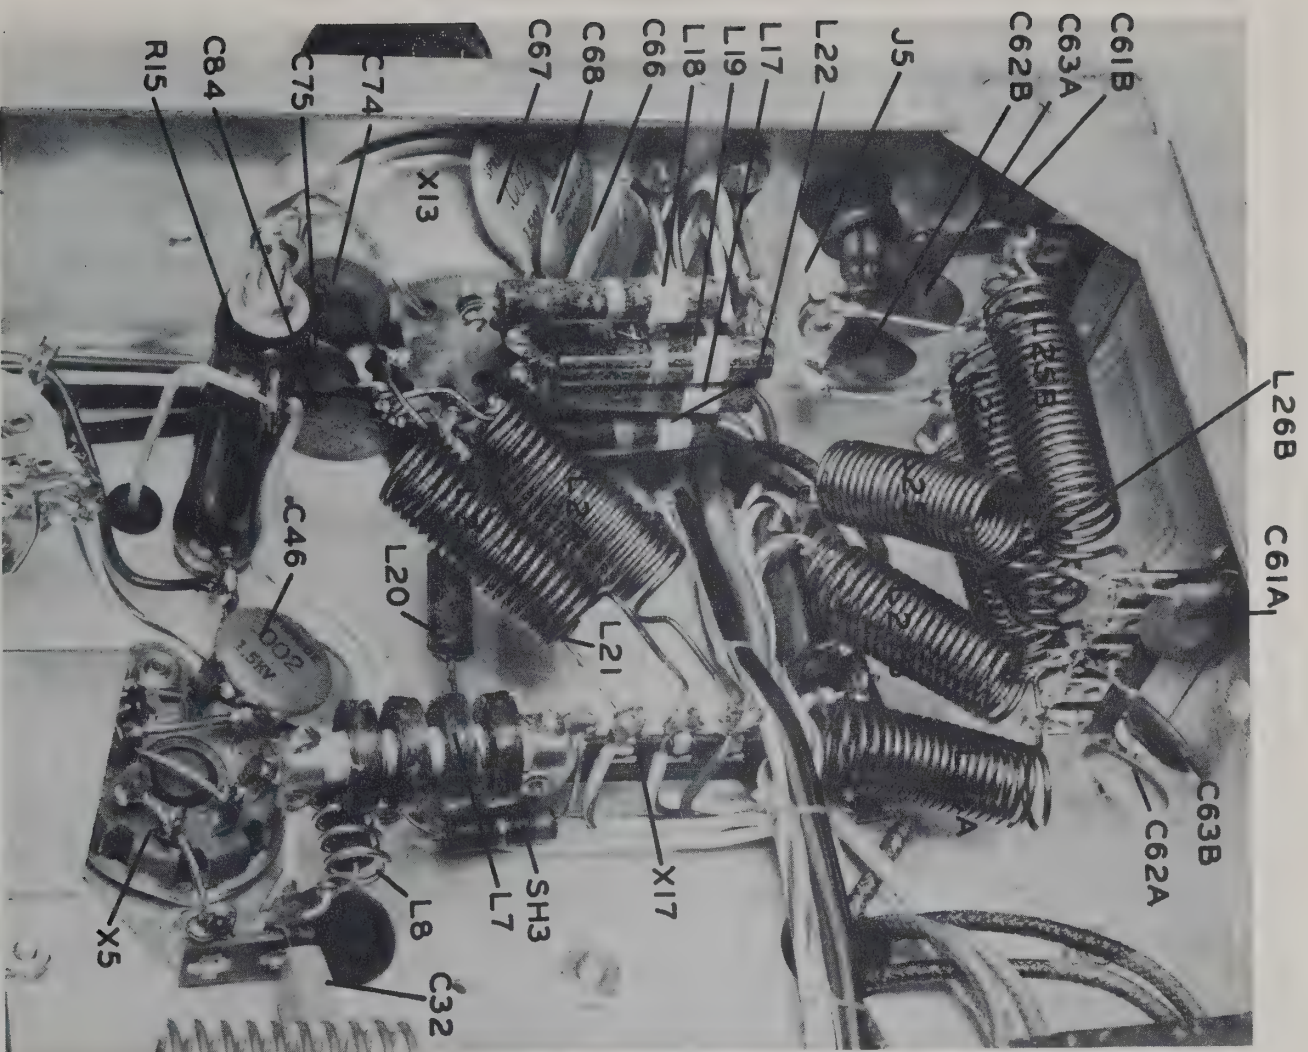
A. LINE FILTER AND AUXILIARY SOCKET.
